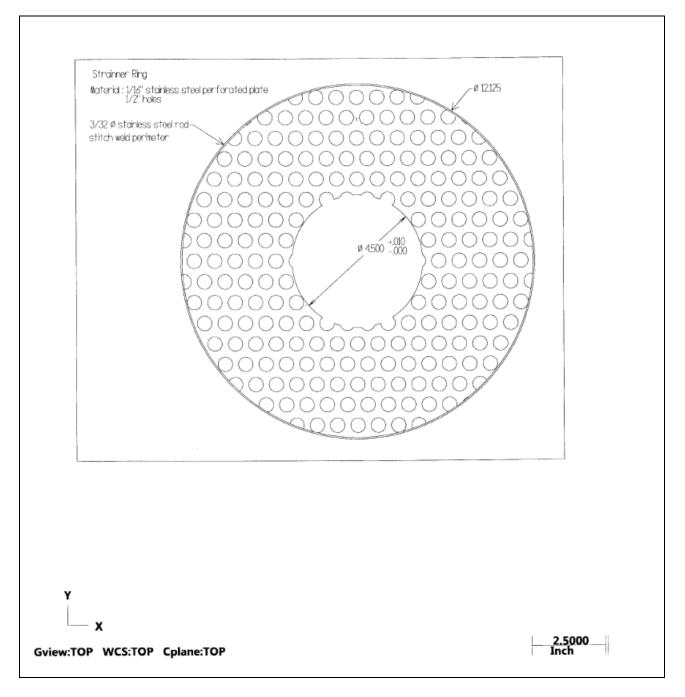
Technical drawing of the perforated depth control ring, sandwiched between the top ring (Figure B1) and the body collar (Figure B3)
